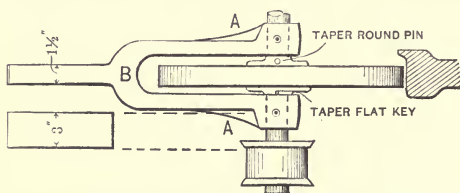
EMERY-WHEEL HOLDER FOR CAR WHEELS. (BRIGLEY).
